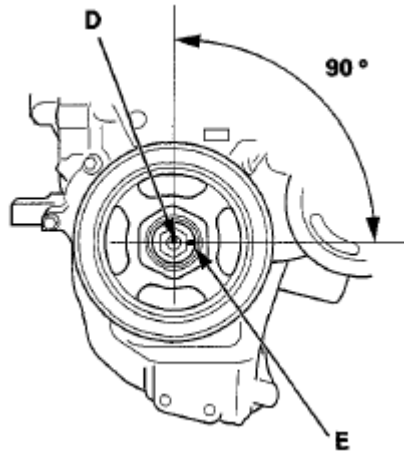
Identifying Crankshaft Pulley Bolts Tightening Angle
